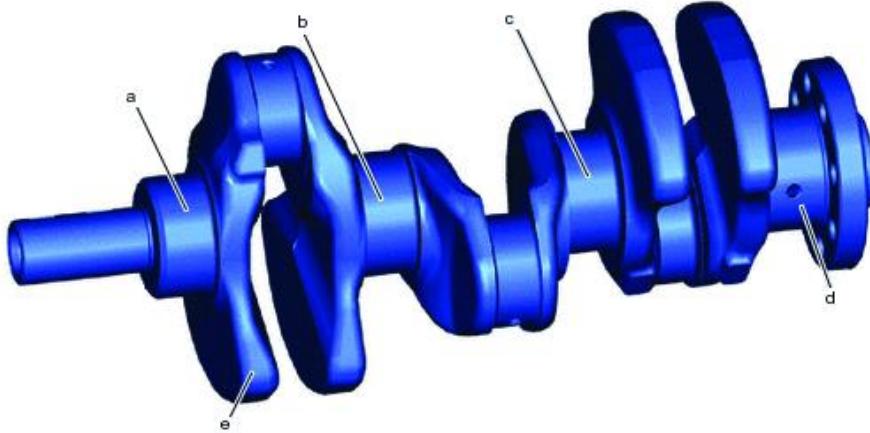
Example of crankshaft by Toyota (a-d= journal, e= balance weight). [46]
